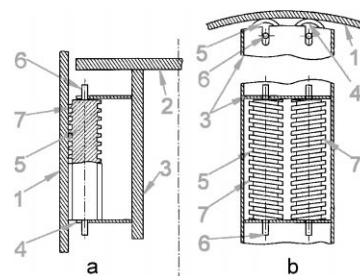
Profiled-surface roller wiper, simple (a) and twinned (b). 1 — evaporating cylinder, 2 — wiping basket, 3 — bearing channel, 4 — locating groove, 5 — wiping element, 6 — pin, 7 — screw thread.
